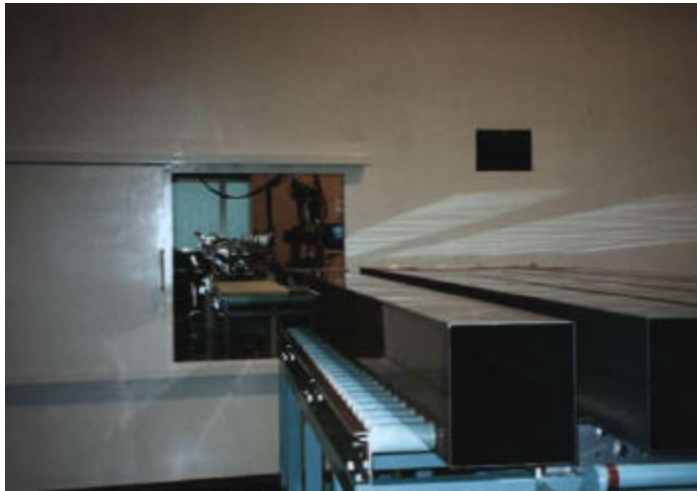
Fuel Square Tube after Longitudinal Butt Welding
